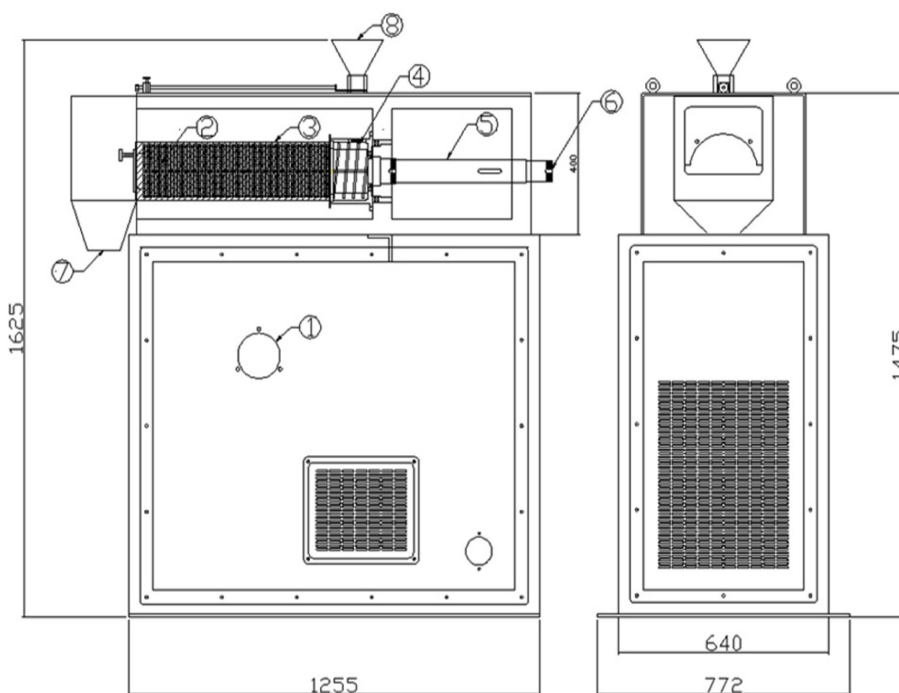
Schematic diagram of the cutting type rice milling machine. ① rice bran outlet, ② cutting roller ③ metallic mesh, ④ transfer screw, ⑤ main shaft, ⑥ air inlet, ⑦ milled rice outlet, ⑧ brown rice inlet.
